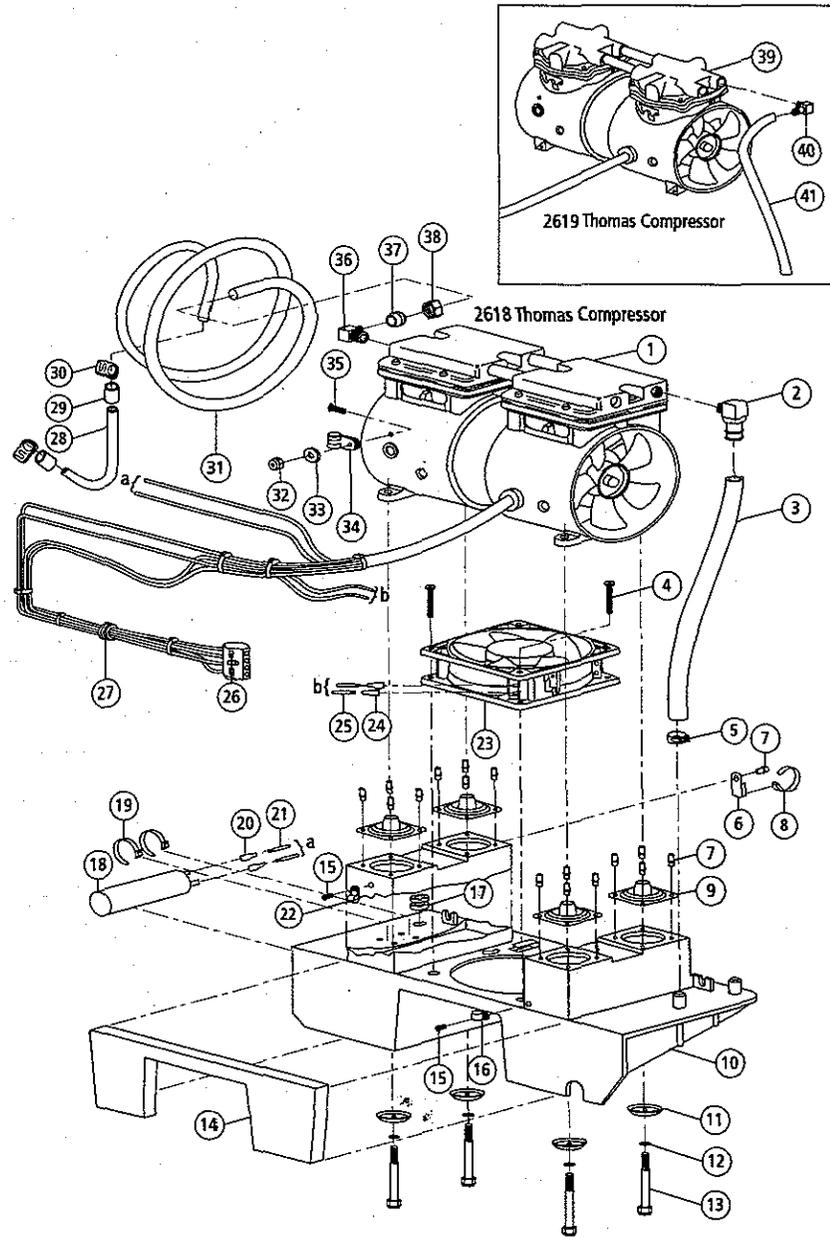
2618 and 2619 Thomas Compressor Platform Assemblies
